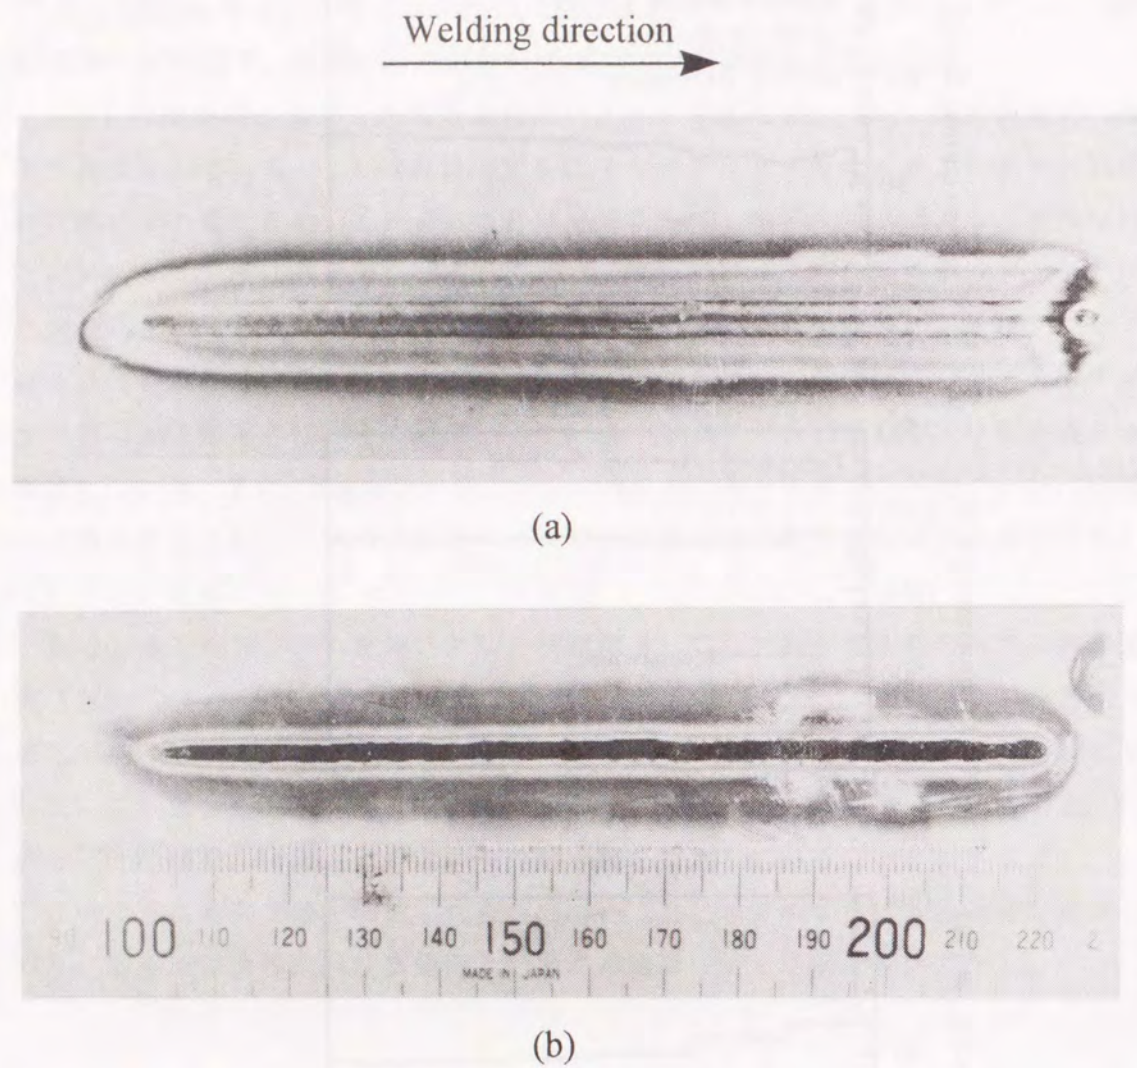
Bead appearance after GTA welding in-process of real-time optimum control
